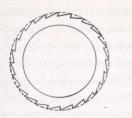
Sections machined from bar stock or pipe can often be replaced by aluminum sections extruded to exact shape and size.
